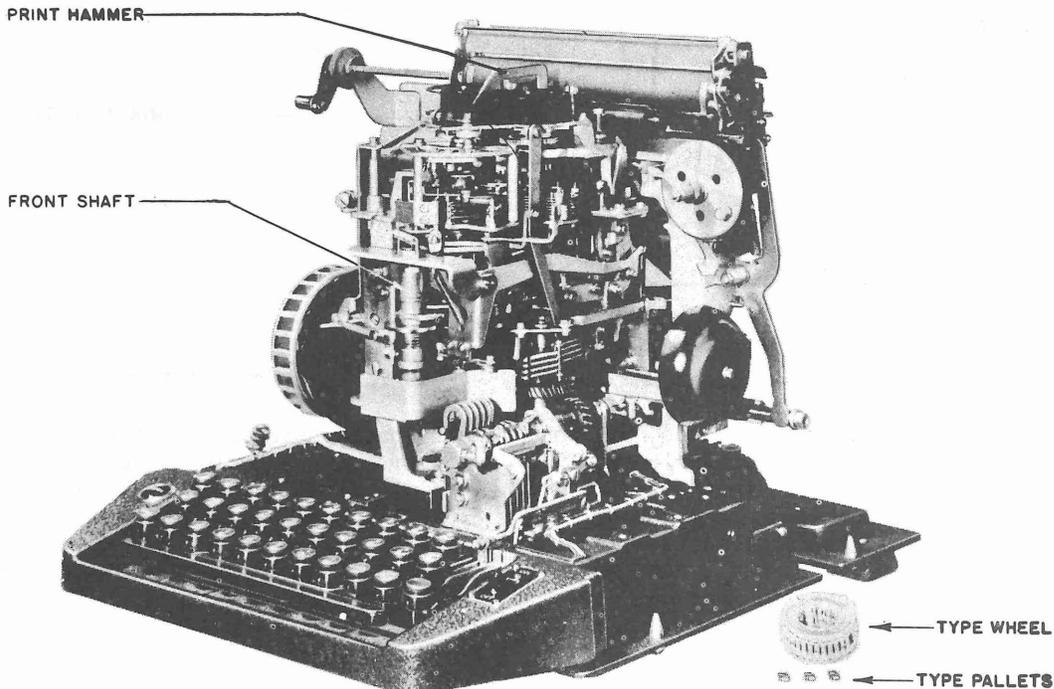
No. 26-Type Teletypewriter (Cover Removed)
